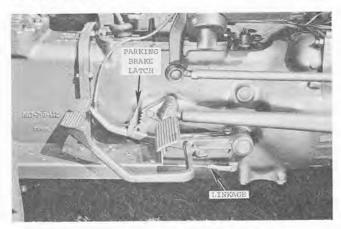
Brake Linkage Adjustment - Right Wheel
